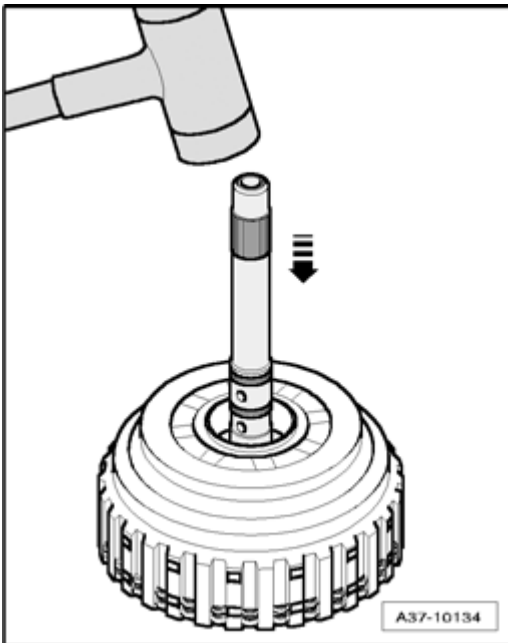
Hitting Input Shaft Using A Plastic Hammer
